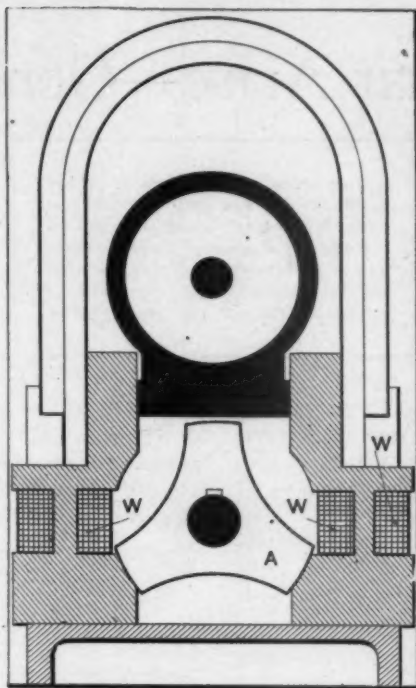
Type of magneto using a rotor to interrupt the magnetic circuit, but the windings are on soft polar members to which the permanent magnets are bolted
